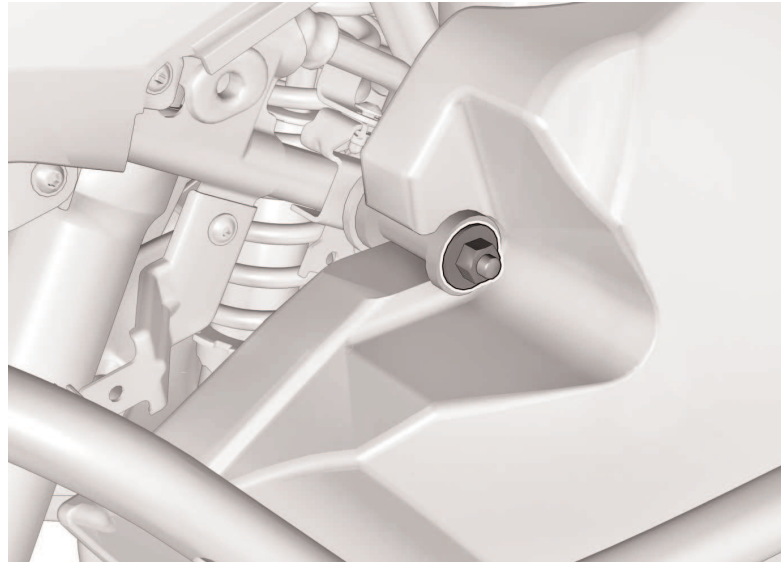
Construction status 1 with nut on outside - thread-locking compound must be applied to secure the threaded fastener of each front fuel-tank mount.
